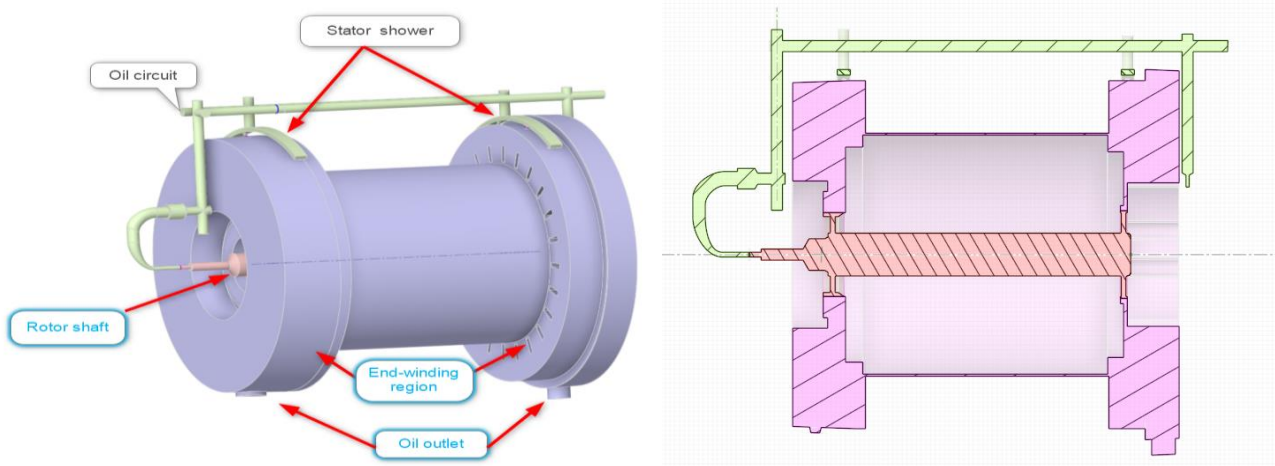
(a) Simplified motor geometry with the oil-circuits (b) Cross-section view of motor geometry
